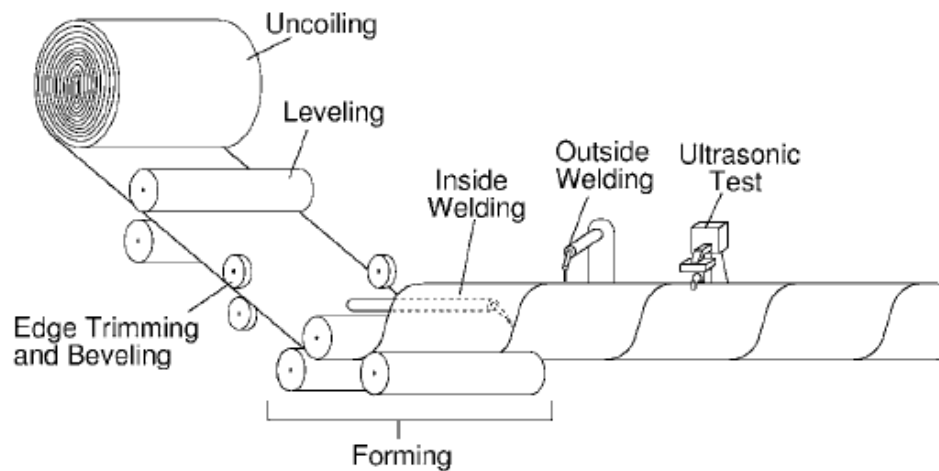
Schematic representation of a spiral weld pipe mill [11].
